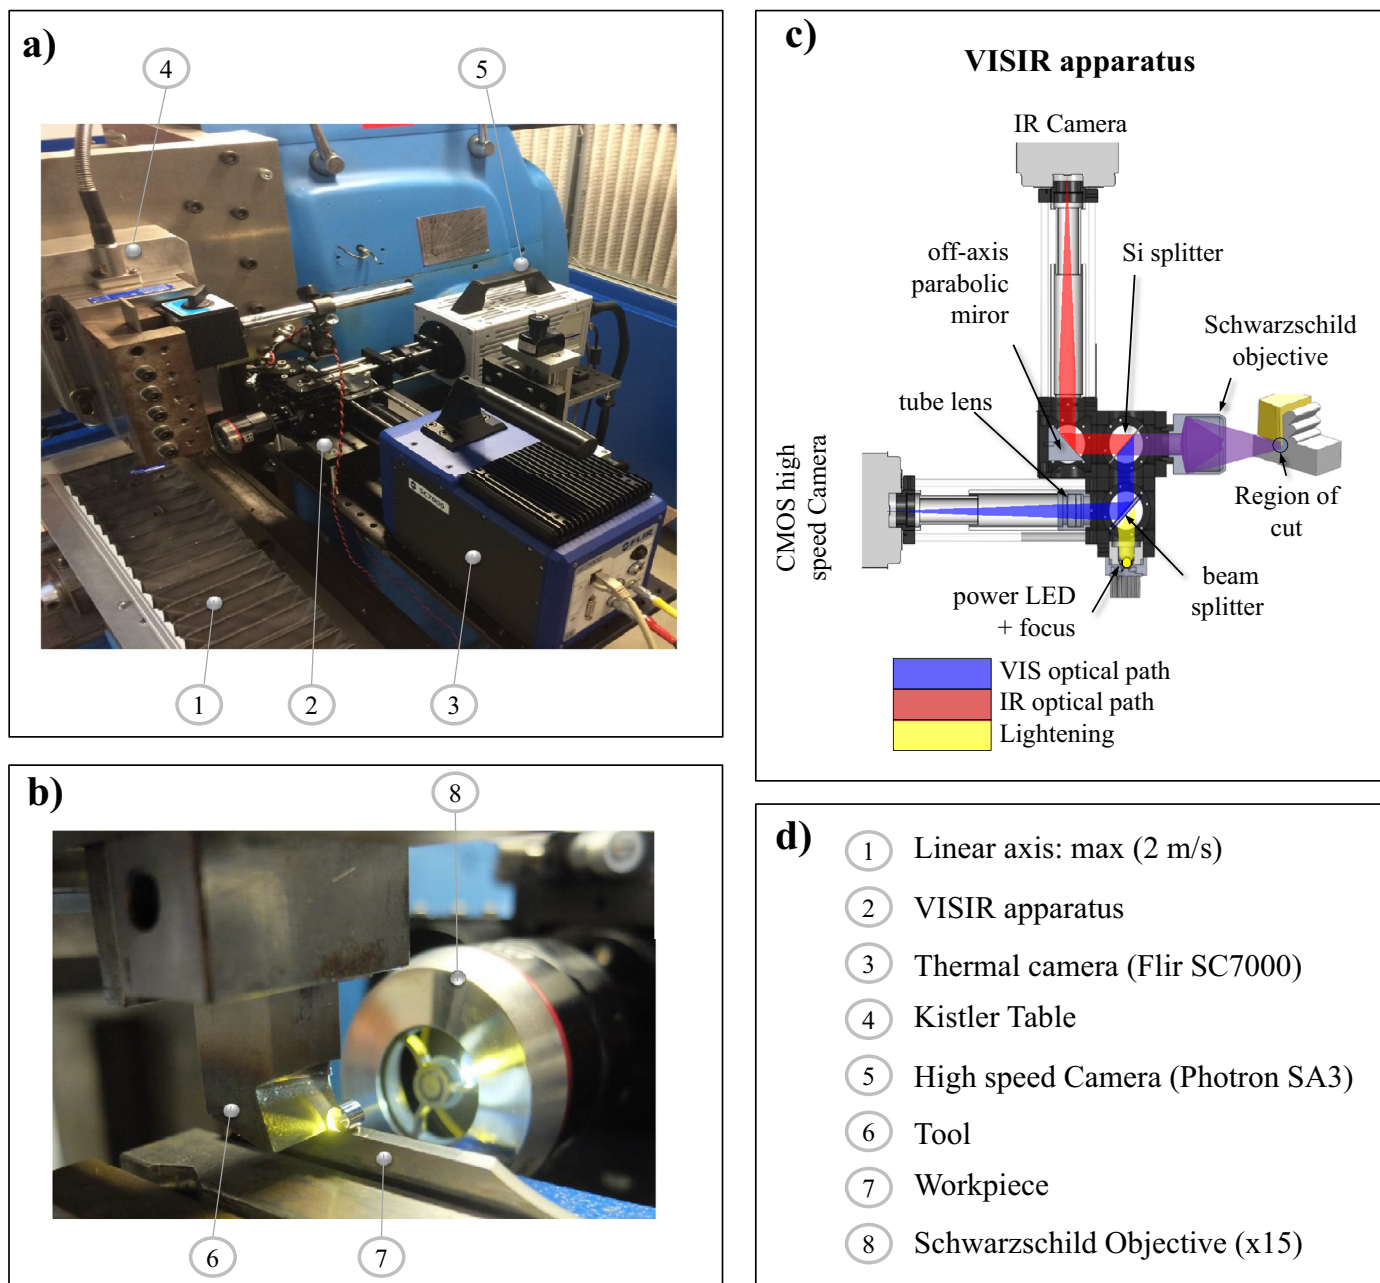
Orthogonal cutting experimental setup: a) linear actuator, cutting tool and optical apparatus b) close up view of the cut c) VIS-IR apparatus detailed design d) nomenclature.
